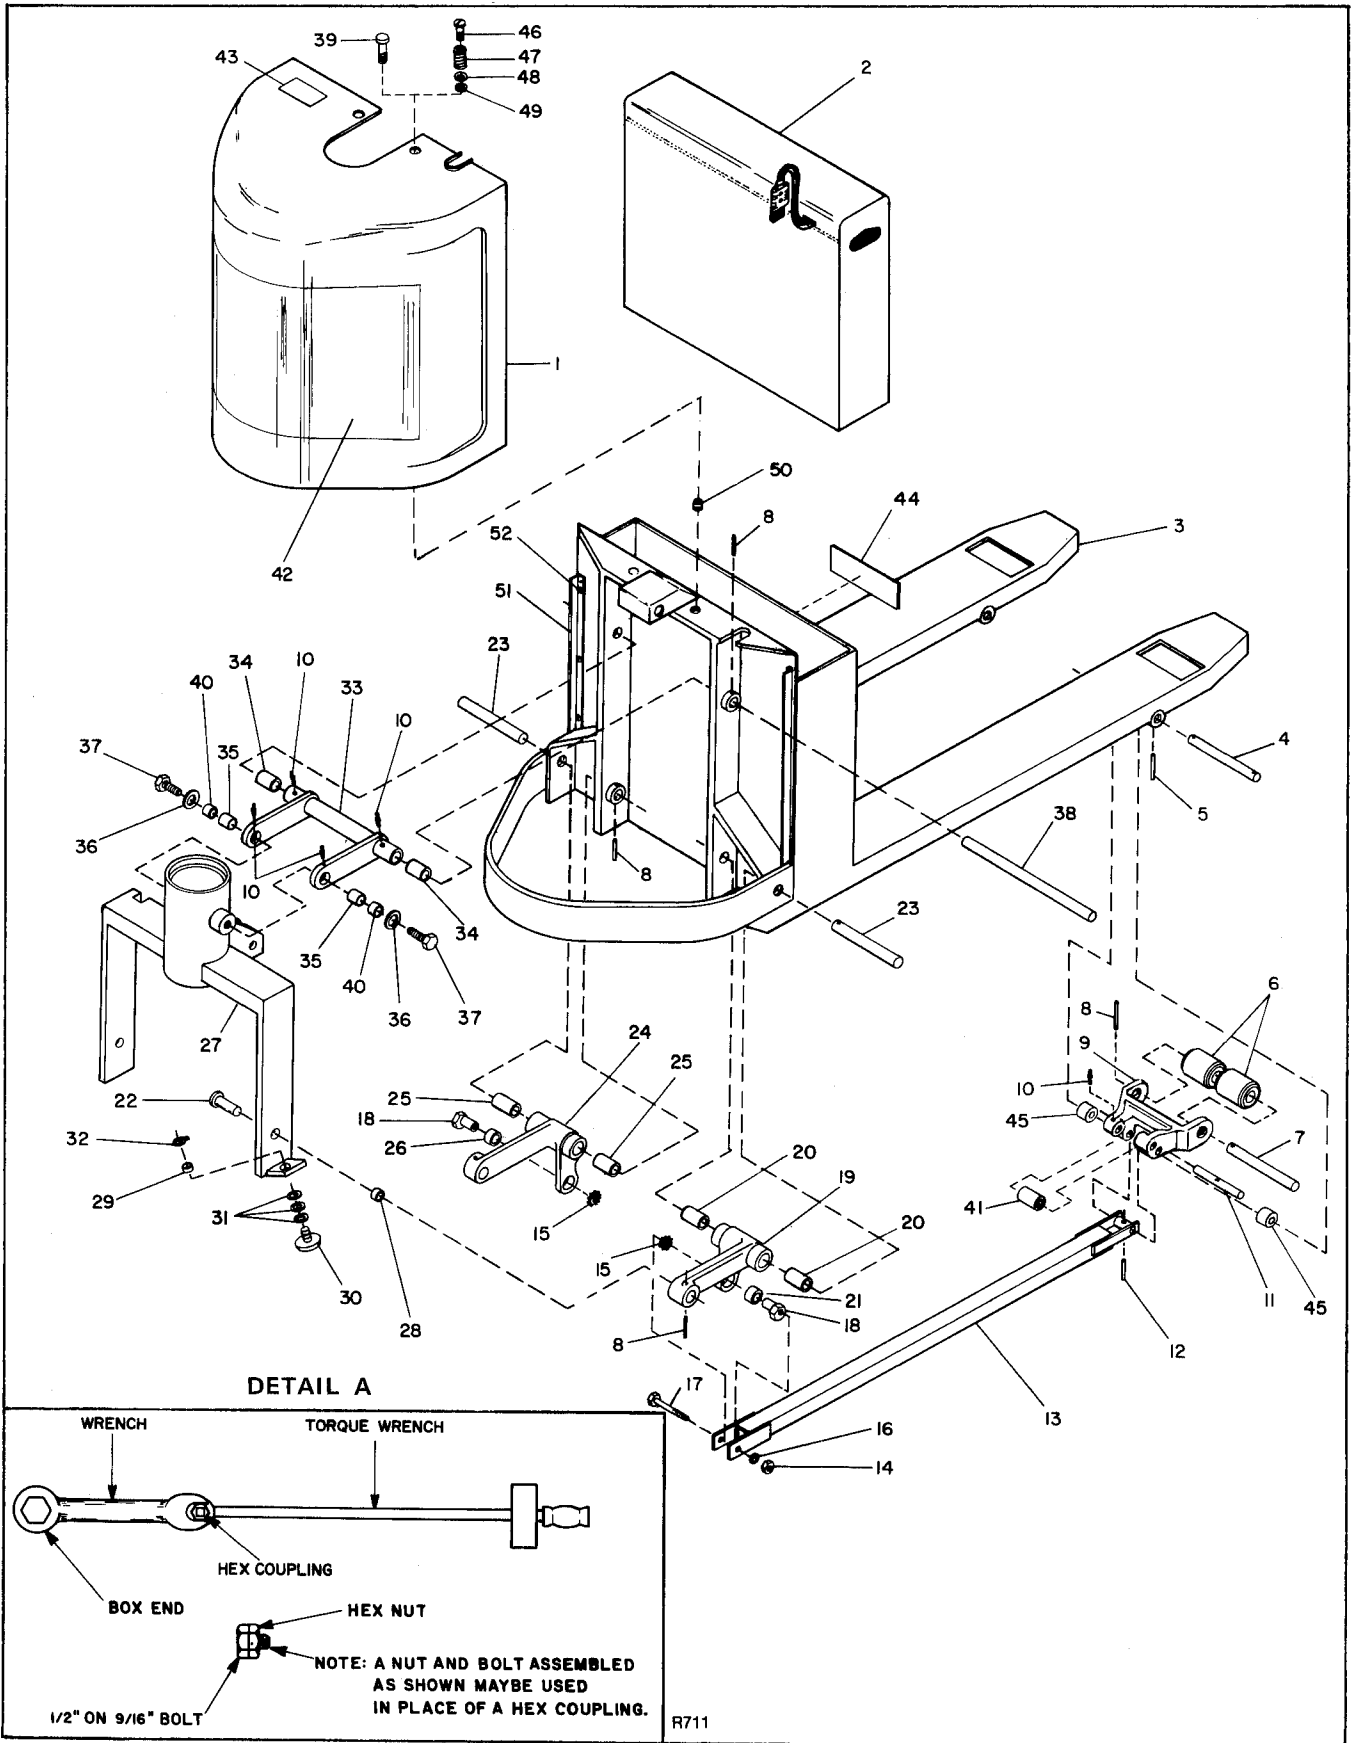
Standard Chassis and Pivot Assembly (Eccentric Adjusted Push Rods)
